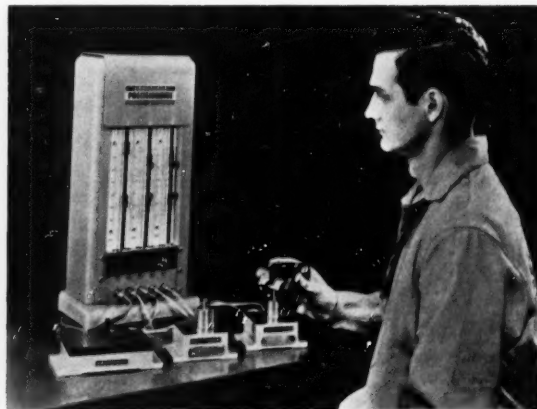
Sheffield progressive type air gage for inspecting five dimensions of oil-pump body
